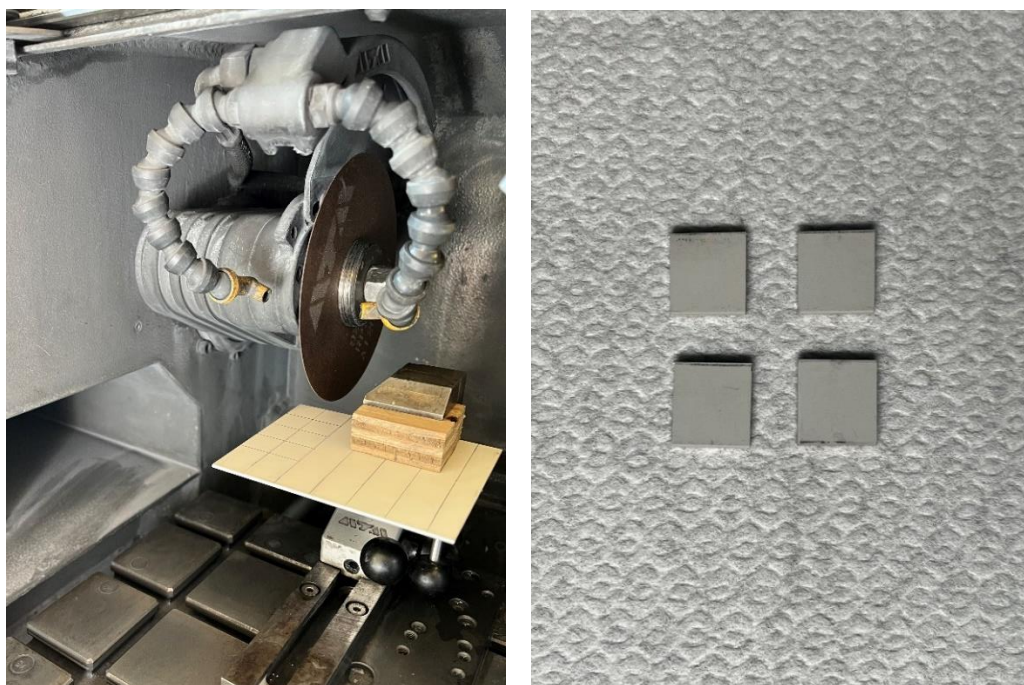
Cut of Al panel in suitable substrates with Brillant 220 cutting machine
